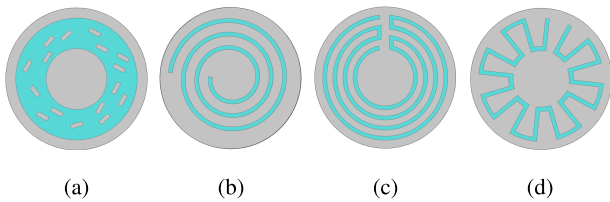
Examples of end cover cooling jackets for AFPM machines: (a) single channel or cavity [96], [115], (b) helical channels [96], (c) tandem channels [116], (d) z-shaped channels [95], [96], [114], and single fluid cavity [89], [92], [112], [113].
